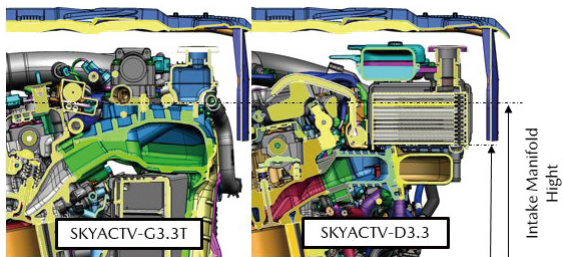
Cross-Sectional Diagram of Intake Manifold
